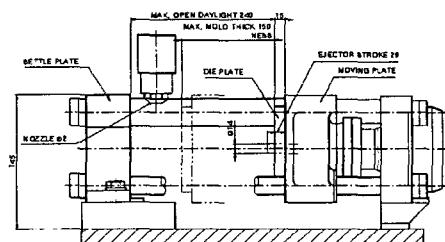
Assembly drawing of clamping unit for micro injection molding machine
